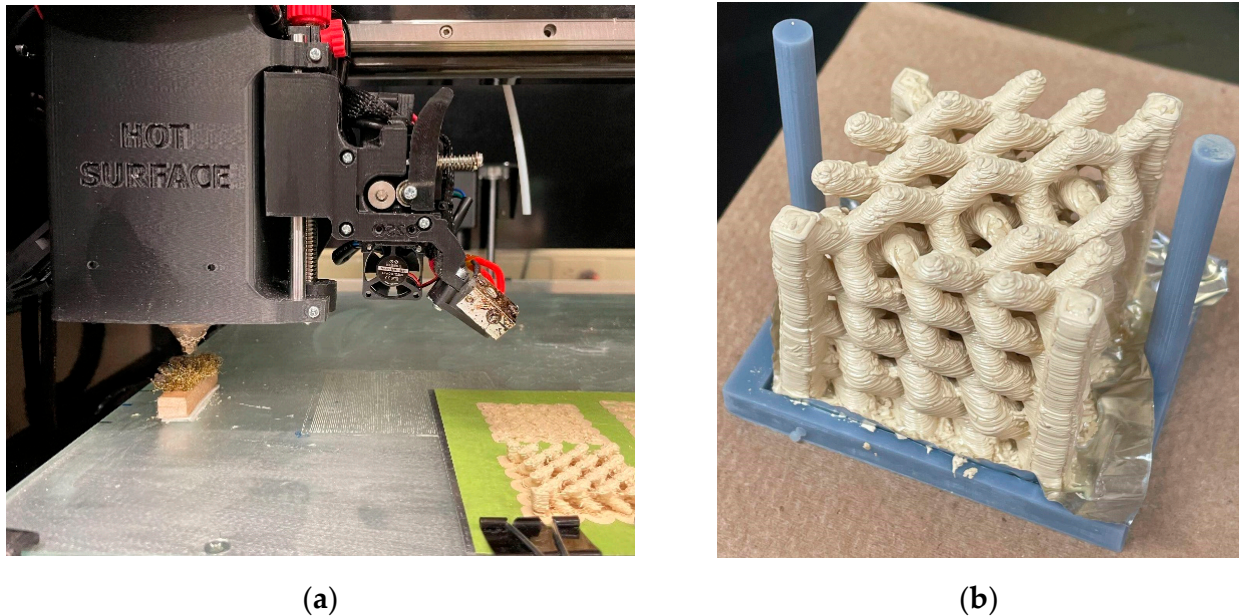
(a) Nozzle cleaning system on the printing bed; (b) 3D photonic crystal with surface defects removed by immersing in acetone for 30 min.
